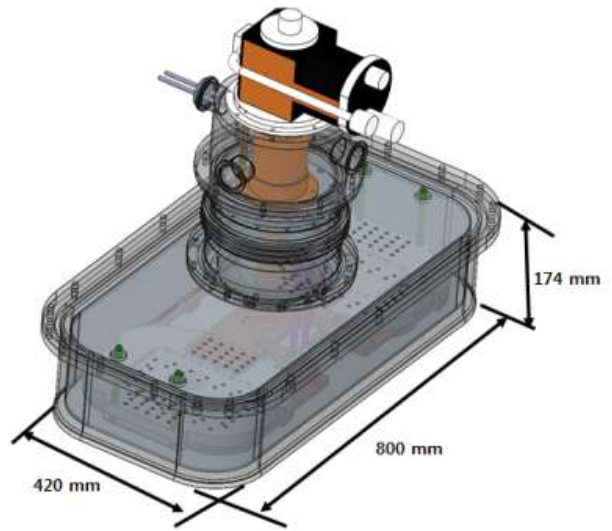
3D drawing of the 1st prototype REBCO magnet
